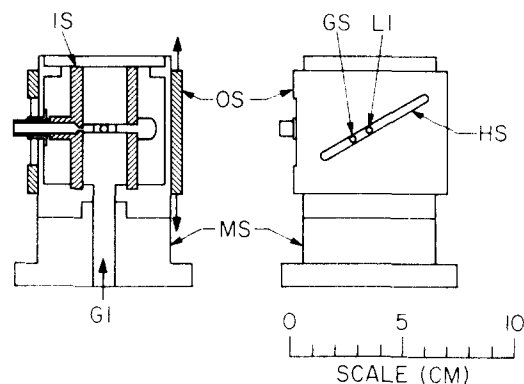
Section and external views of sample chamber. Hatched areas are sections of the inner and outer shells. OS—outer shell; MS—middle shell; IS—inner shell; GI—gas inlet; HS—helical slot; GS—guide screw for helical slot; LI—light inlet hole. Motion of OS and flow sample are shown with vertical arrows.
